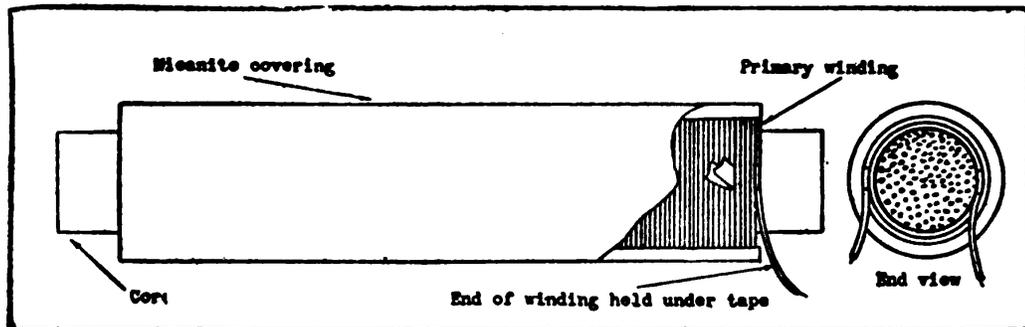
Core and primary, showing how finishing end of primary winding is held under a loop of tape
